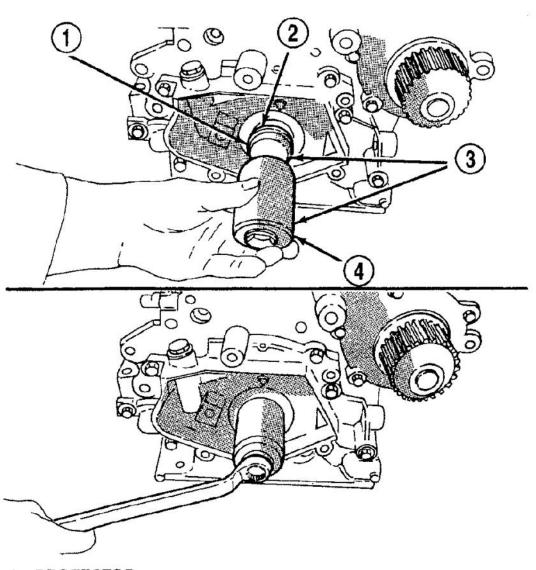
Identifying Oil Pump Sealing Courtesy of DAIMLERCHRYSLER CORP.
